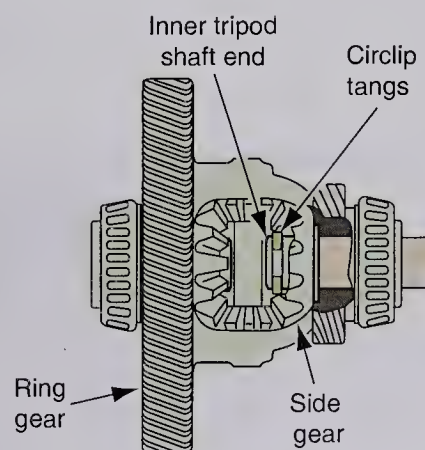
Compressible circlips in early model Chrysler transaxles.
